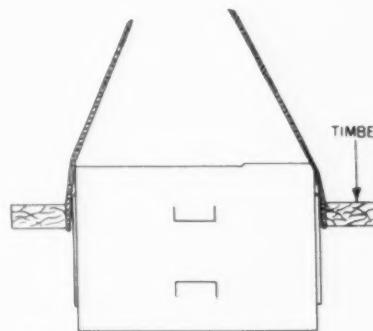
A timber can be used to protect machined surfaces when lifting a magnet frame.
